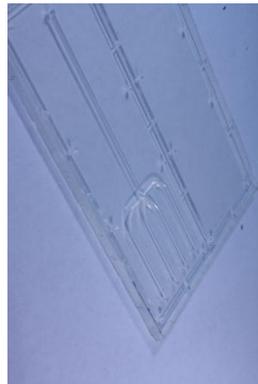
Fluidic chip and cover slide hot embossed into PMMA.
